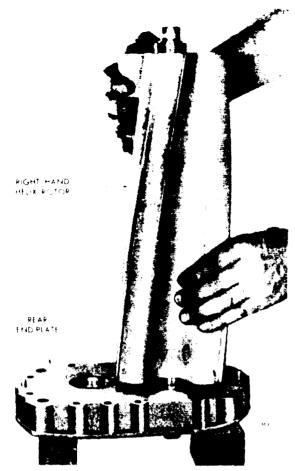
D-15. Installing Blower Rotor in Rear End Plate
